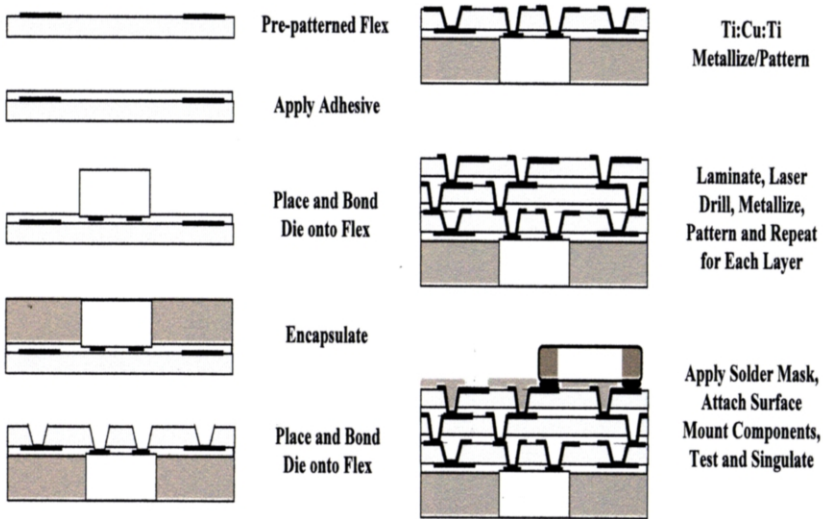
GE HDI MCM and SMT Printed Circuit Board Assembly
